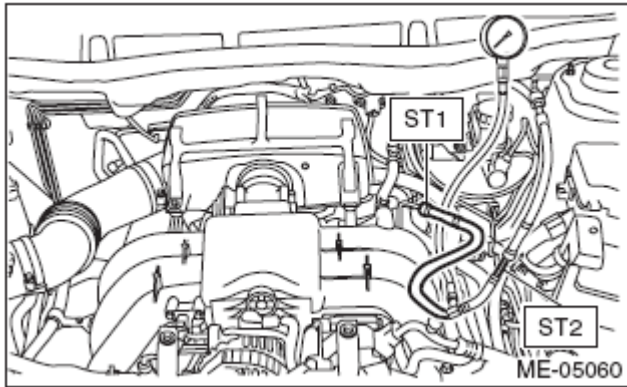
Identifying Fuel Hose And Fuel Pipe Adapter (ST1 And ST2)
